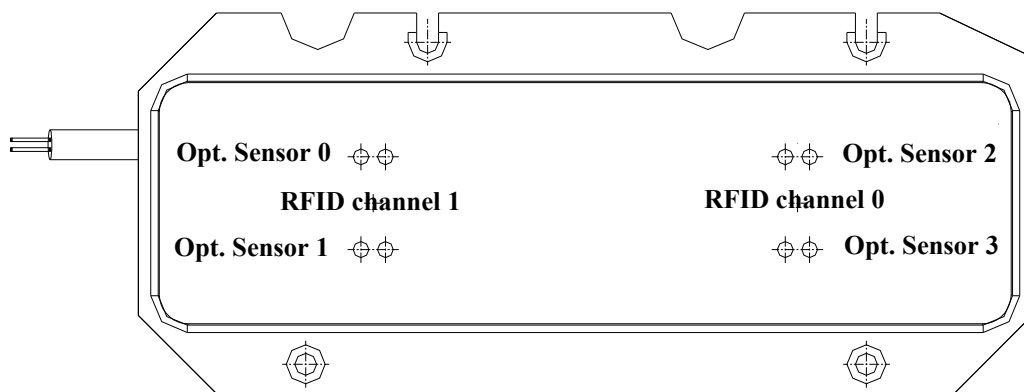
Final assembly of COBAS RFID reader electronic
